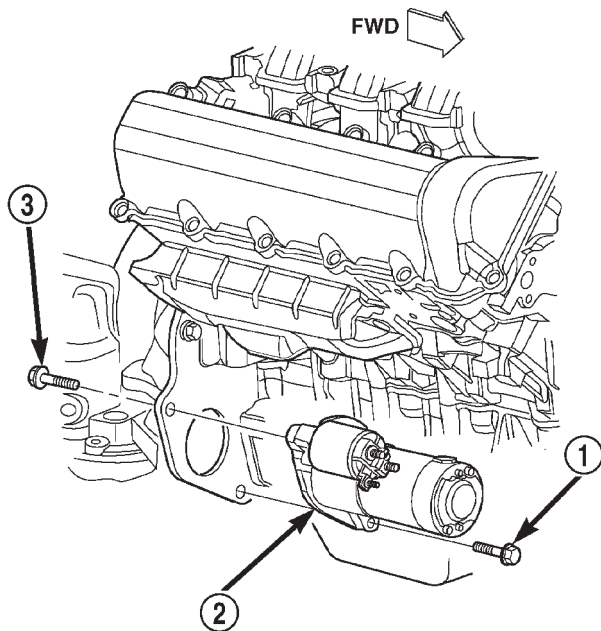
Starter Motor Remove/Install - 4.7L Engine
